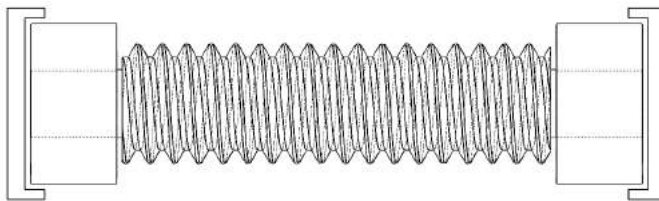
Schematic of how the bearings should be placed within the device. The bearings here are shown at both ends of the spindle.
